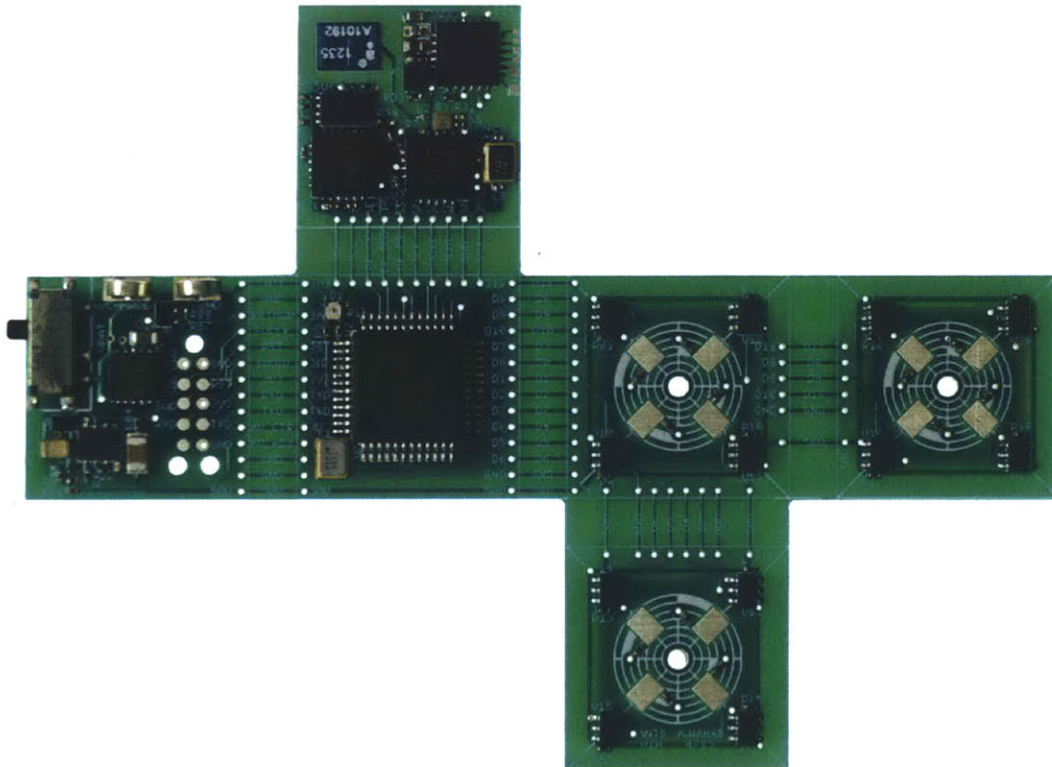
Mark IV rigid PCB assembly prior to final assembly stage.
